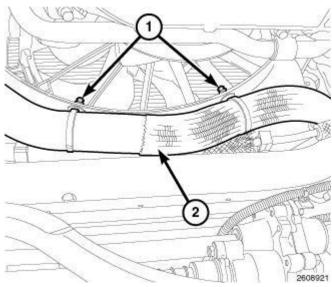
Radiator Hose And Fan Shroud Retainers Courtesy of CHRYSLER LLC
